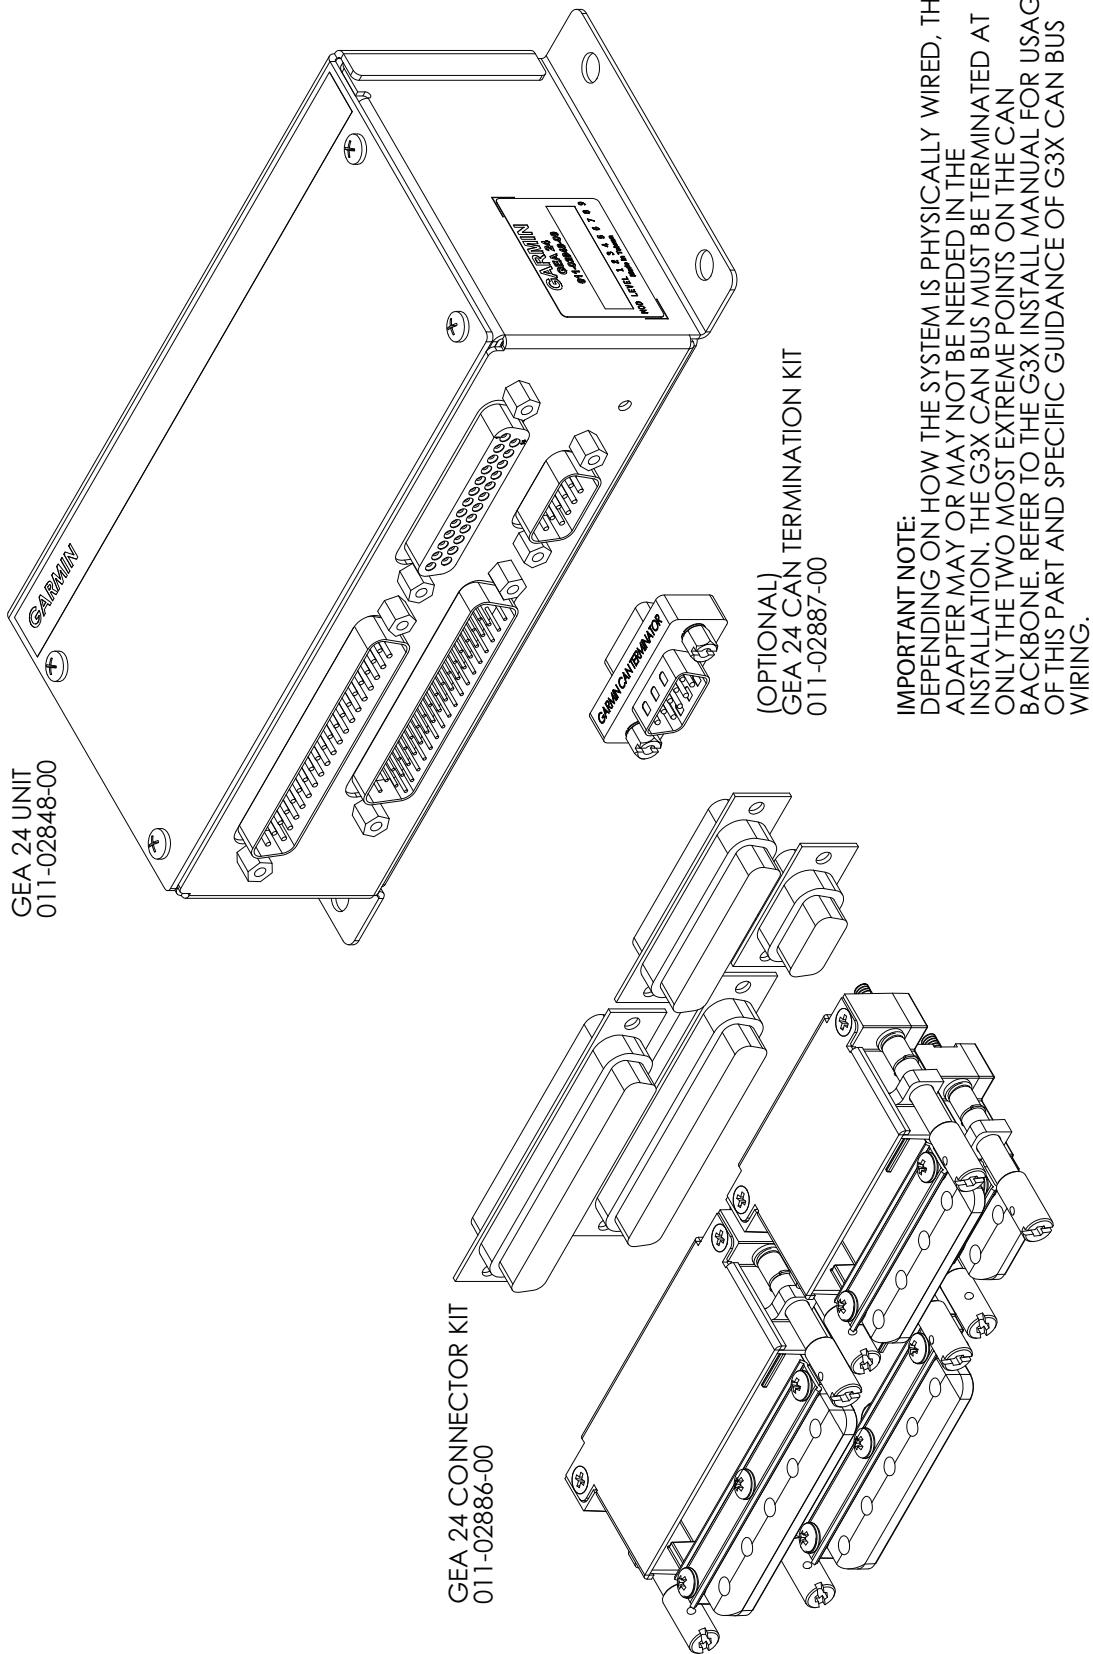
GEA 24 Assembly Drawing (with CAN terminator)
